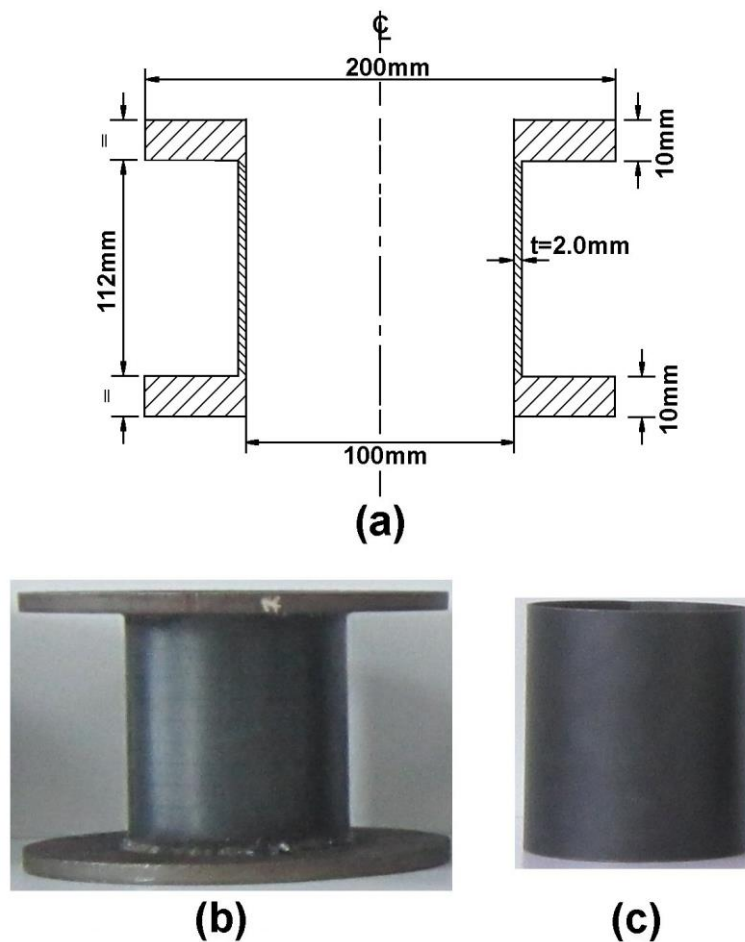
Cylindrical specimen geometry (a) section through cylindrical shell; (b) welded cylinder with flanges; (c) welded cylinder without flanges.
